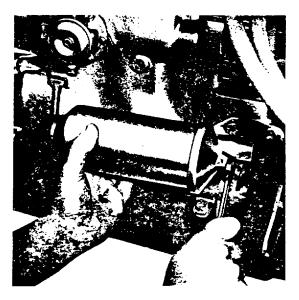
Removing the Lubricating Oil Filter Bowl Securing Screw. (Replaceable element type)
